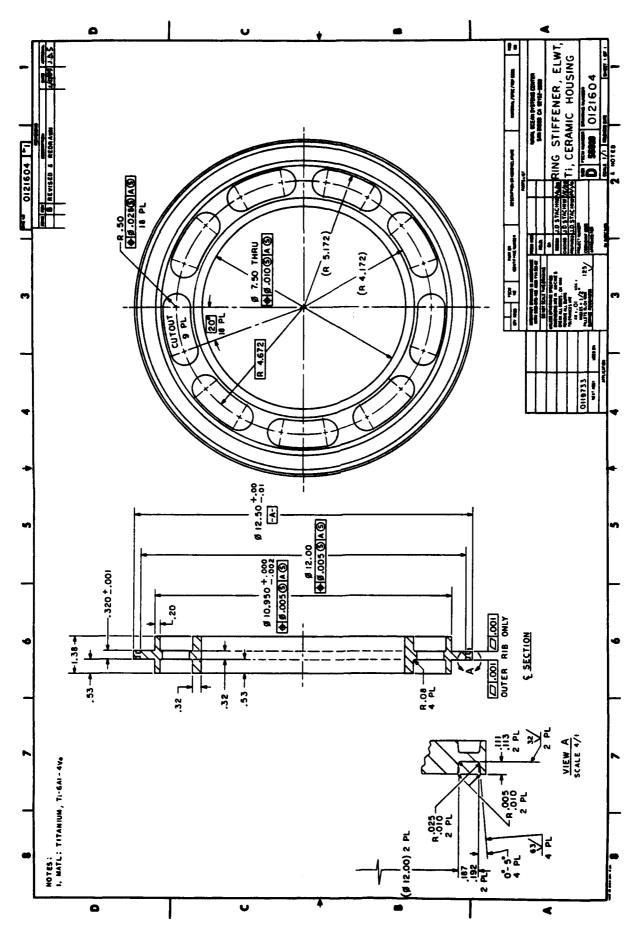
Titanium ring stiffener DWG 0121604; fabrication drawing.
